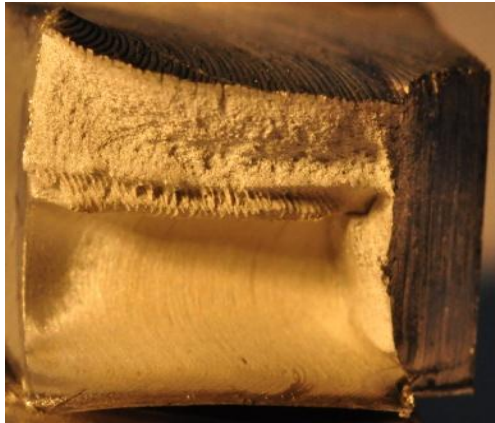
₁. Macrophoto. fracture (800rpm,125mm/min)
